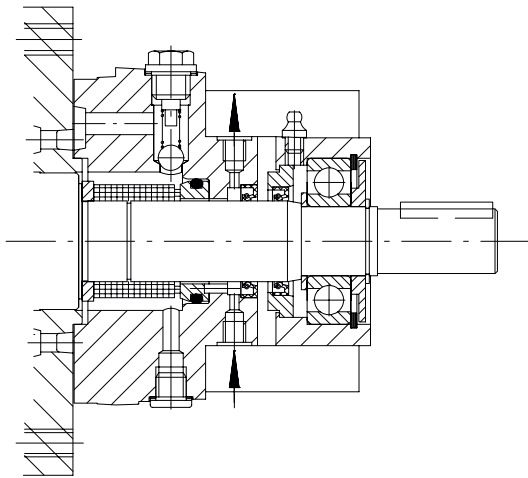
SN..ER..E QW, external bearing, capable of relubrication, mechanical seal, quench (shaft seal ring)
